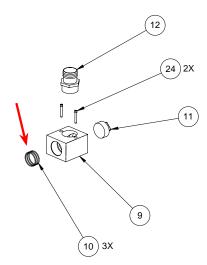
Live-Center Mount Subassembly Showing Location of 3 O-Rings (Number 10)
